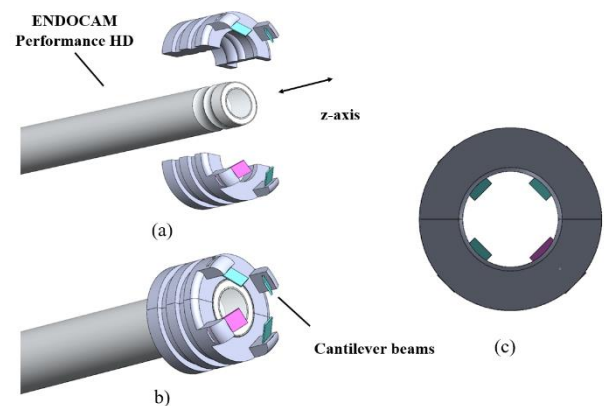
Clip-on stiffness sensor CAD Drawings: (a) Exploded view of the sensor, (b) sensor assembled at the tip of an endoscopic camera, (c) camera field of view. The stiffer beam (in pink), has a lower elasticity than the others.
